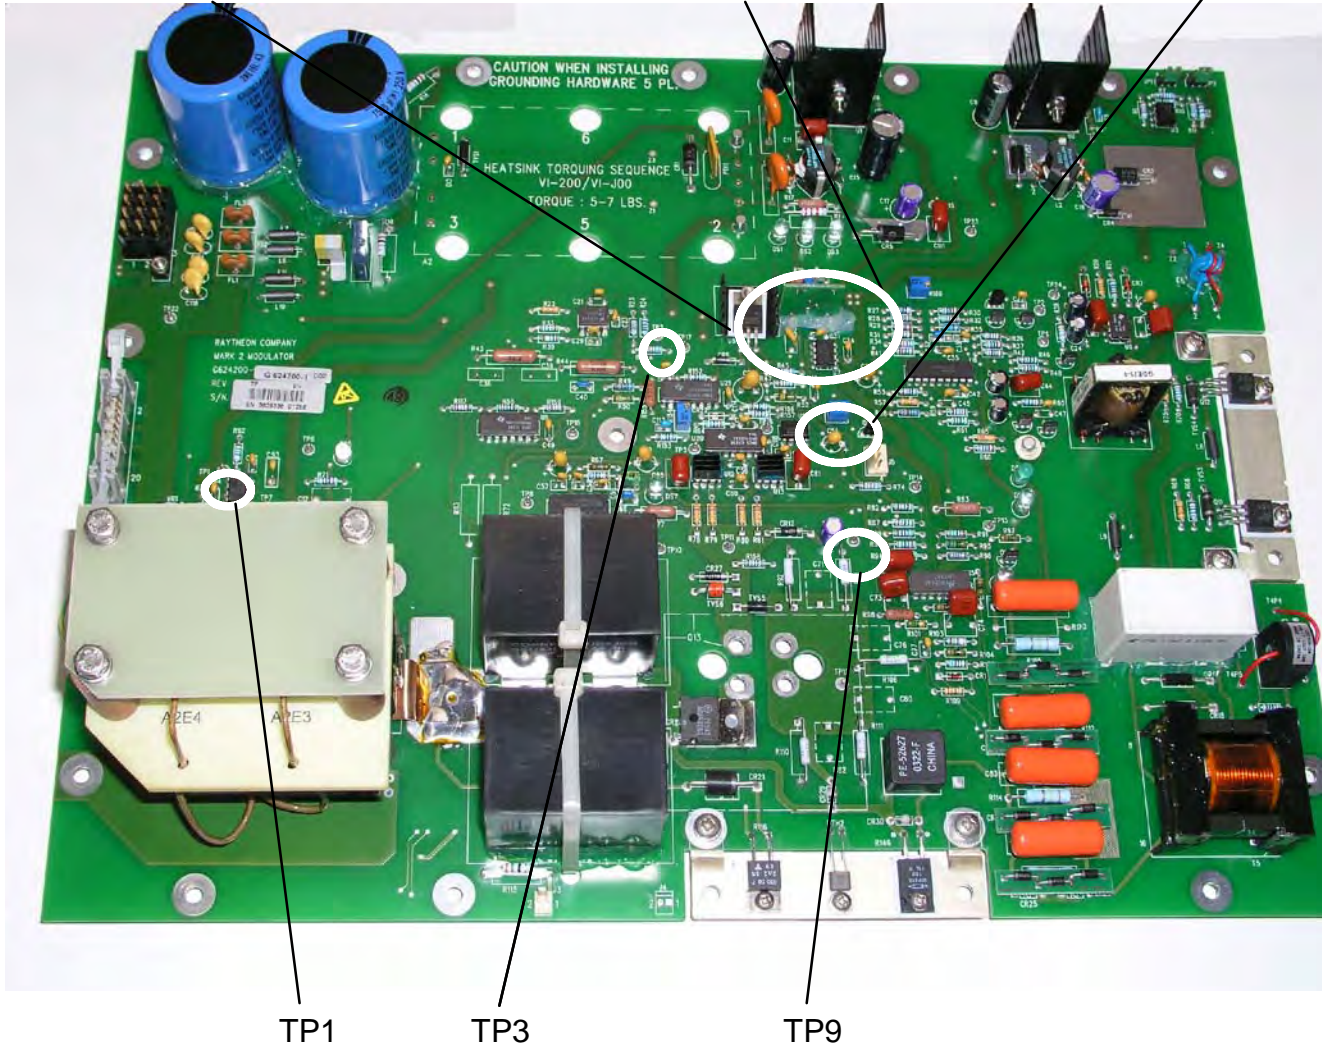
Modulator PCB MAG I Adjustment and Reference Adjust Board
